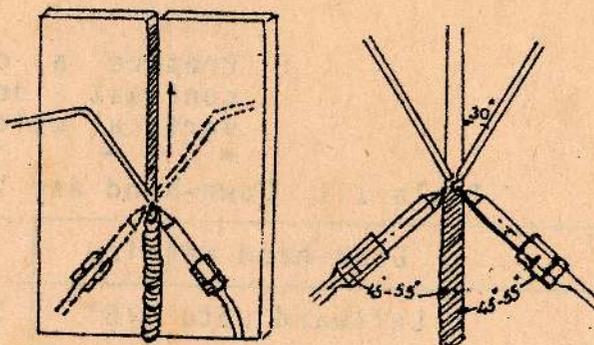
Two operator vertical welding (for unprepared plates of thickness up to 5/8 in.)
